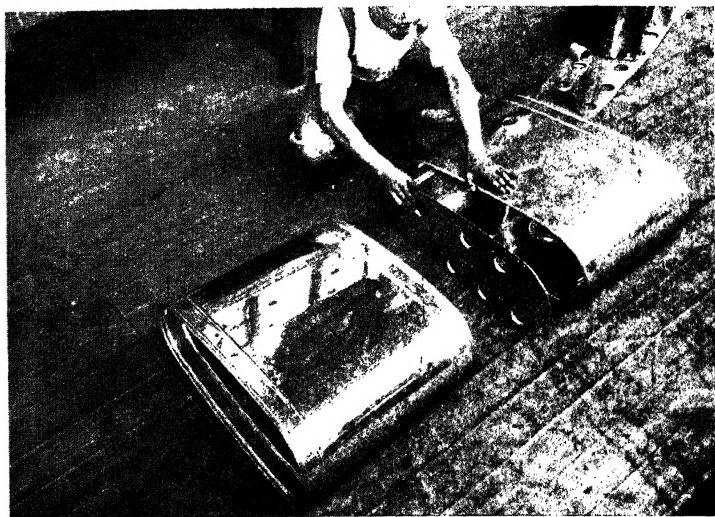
SHOWING BODY HALVES EDGED FOR ASSEMBLY TO BAFFLE.
